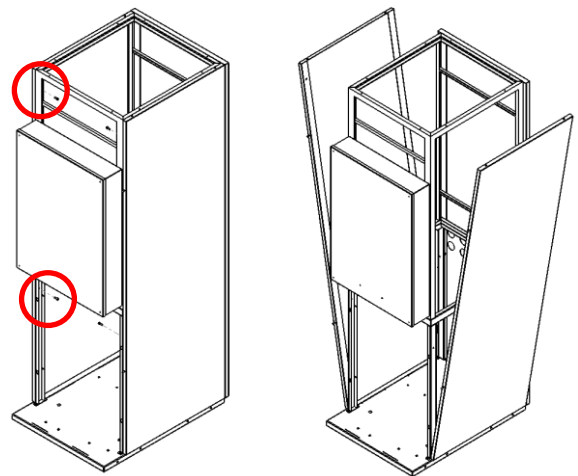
Disassembly process of the lateral covers of Clausius heat pumps with Elite configuration.
